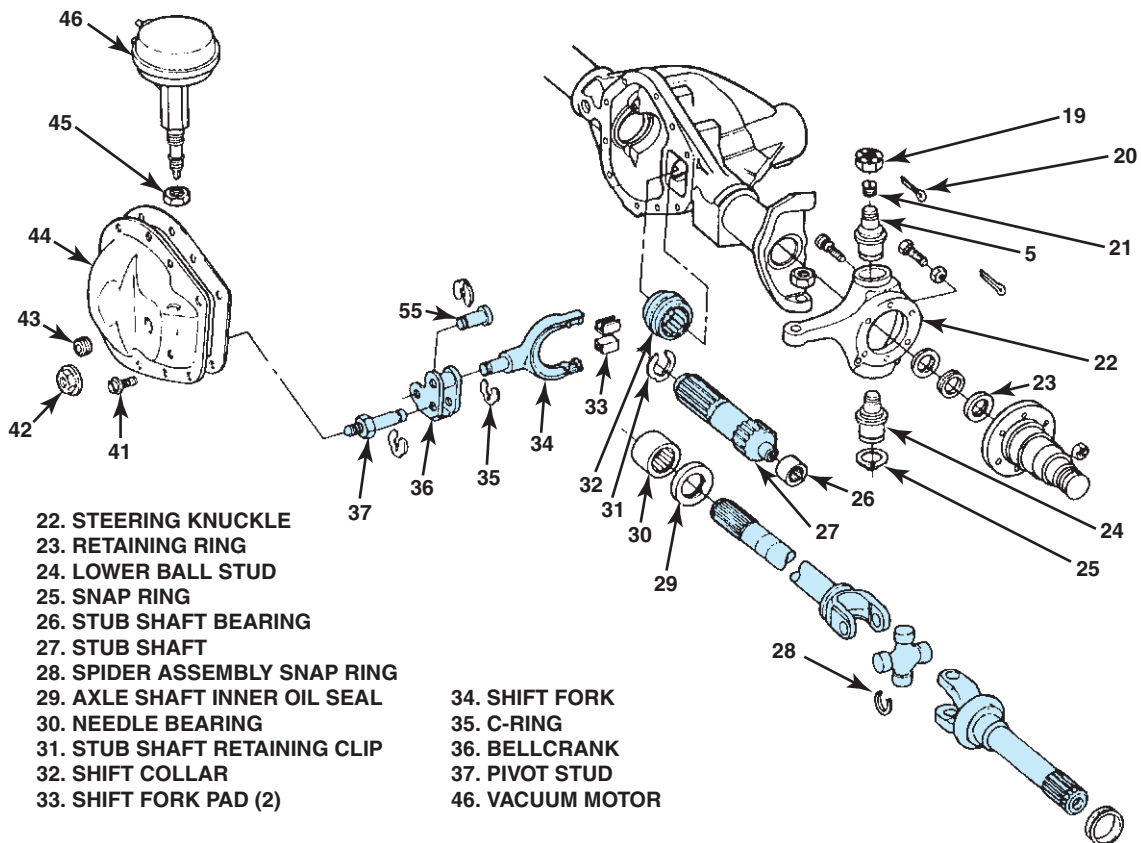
This axle has a vacuum shift feature that allows disconnecting the left axle. (Courtesy of DaimlerChrysler Corporation)
